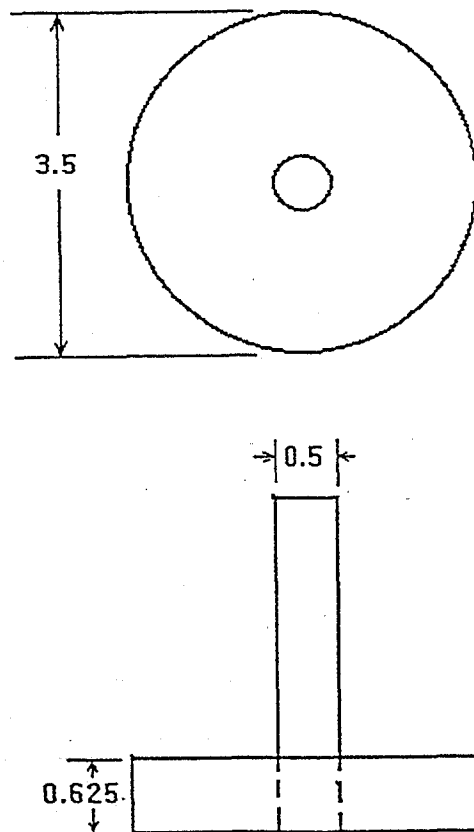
Spin Test Specimen Blanks (Dimensions in Inches)
